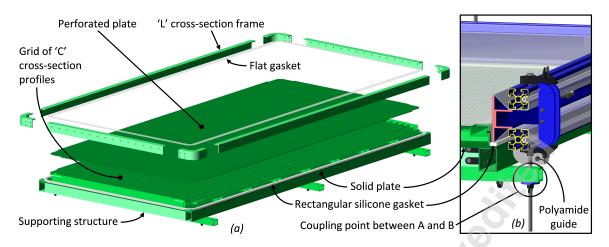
(a) Partially exploded view of the vacuum table (B) and (b) cross-section of the double diaphragm tooling (A) and the vacuum table (B) after coupling.
